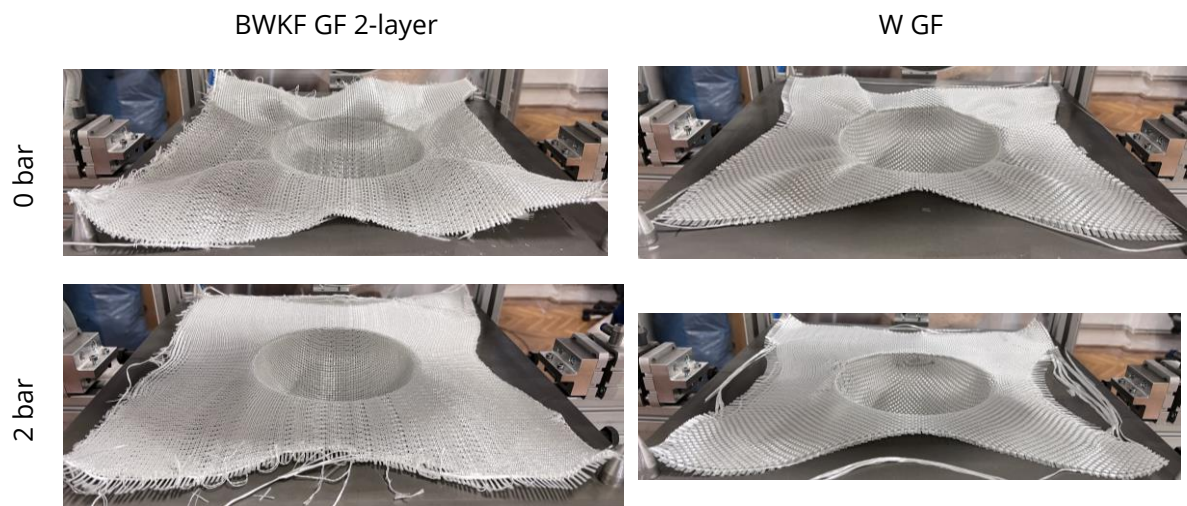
3D preforms at different setting of blank holder pressure (right after forming)
